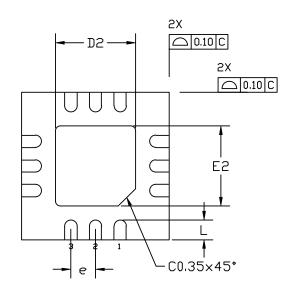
Package Drawing Hana - AYT (Thailand) 12-lead 3 x 3 x 0.75 mm QFN
